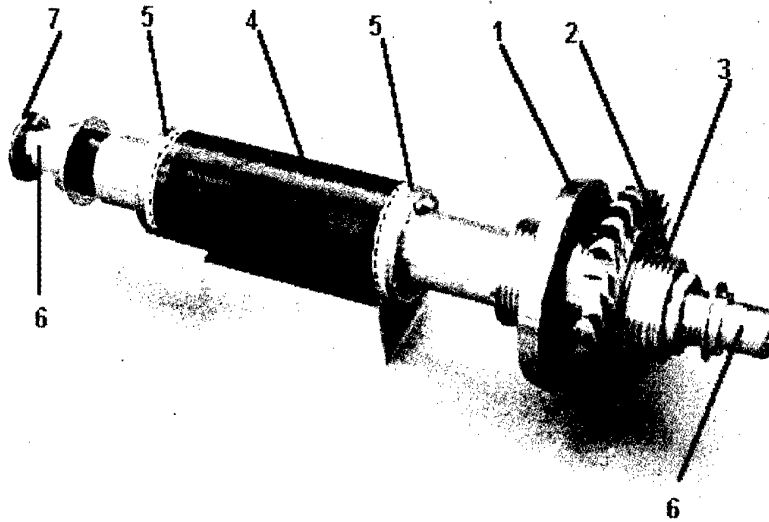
The rotor of the high-speed turbogenerator. 1 turbine 1st stage rotor, 2 turbine 2nd stage rotor, 3 compensation piston, 4 generator rotor, 5 generator cooling fan, 6 radial bearing counter surface, 7 thrust bearing counter surface.
